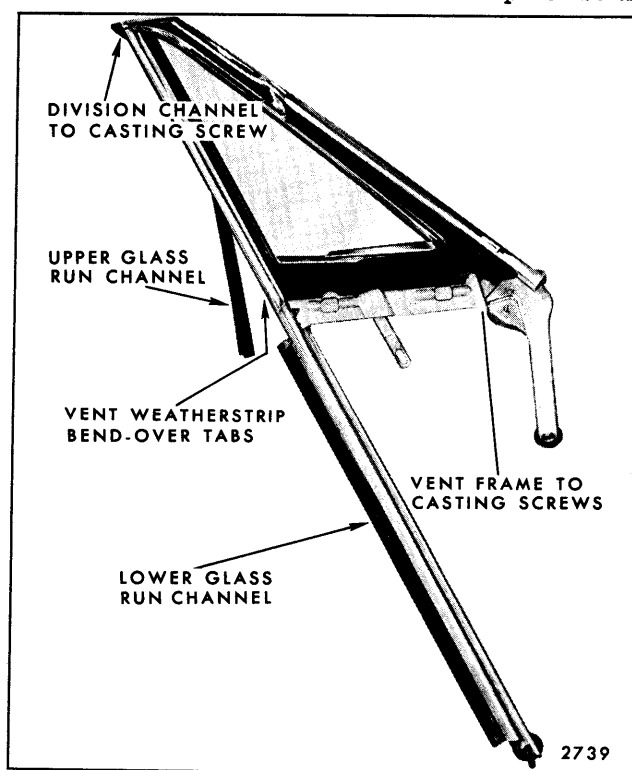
Front Door Ventilator Assembly - "A" Closed Styles
